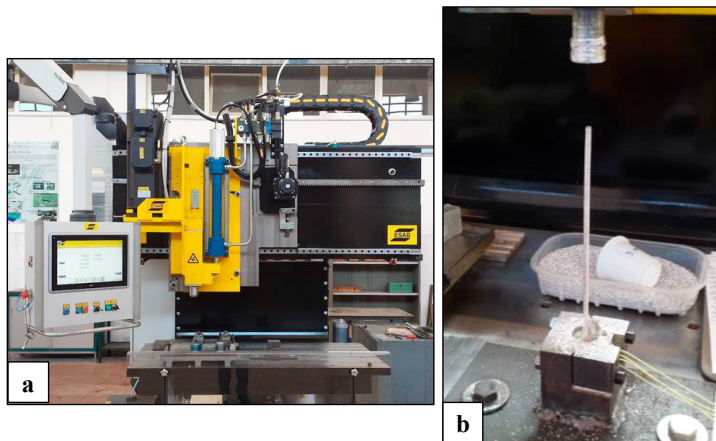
(a) The used machine and (b) an example of the obtained wire.
